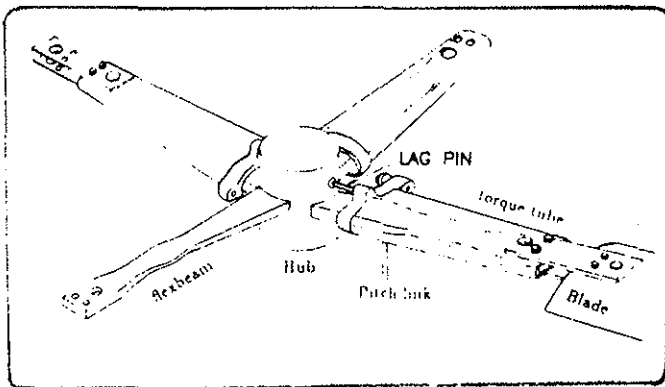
Boeing Vertol's ITR bearingless rotor design.
